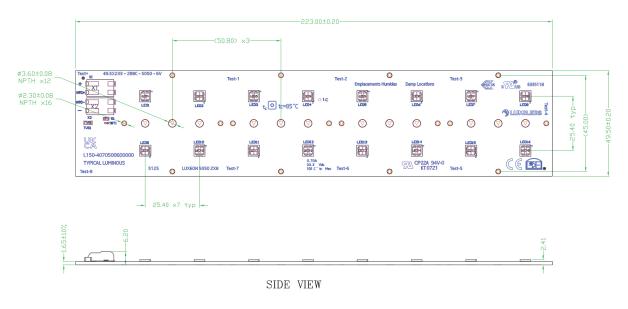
Mechanical dimensions for L150-xxxx500600000
